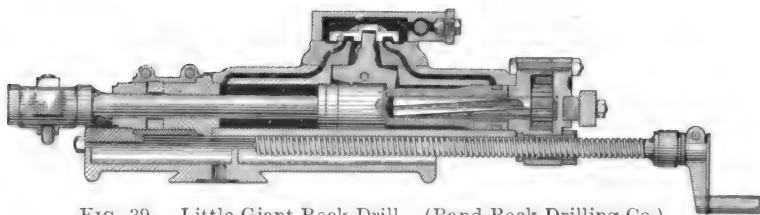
Little Giant Rock Drill. (Rand Rock Drilling Co.)
